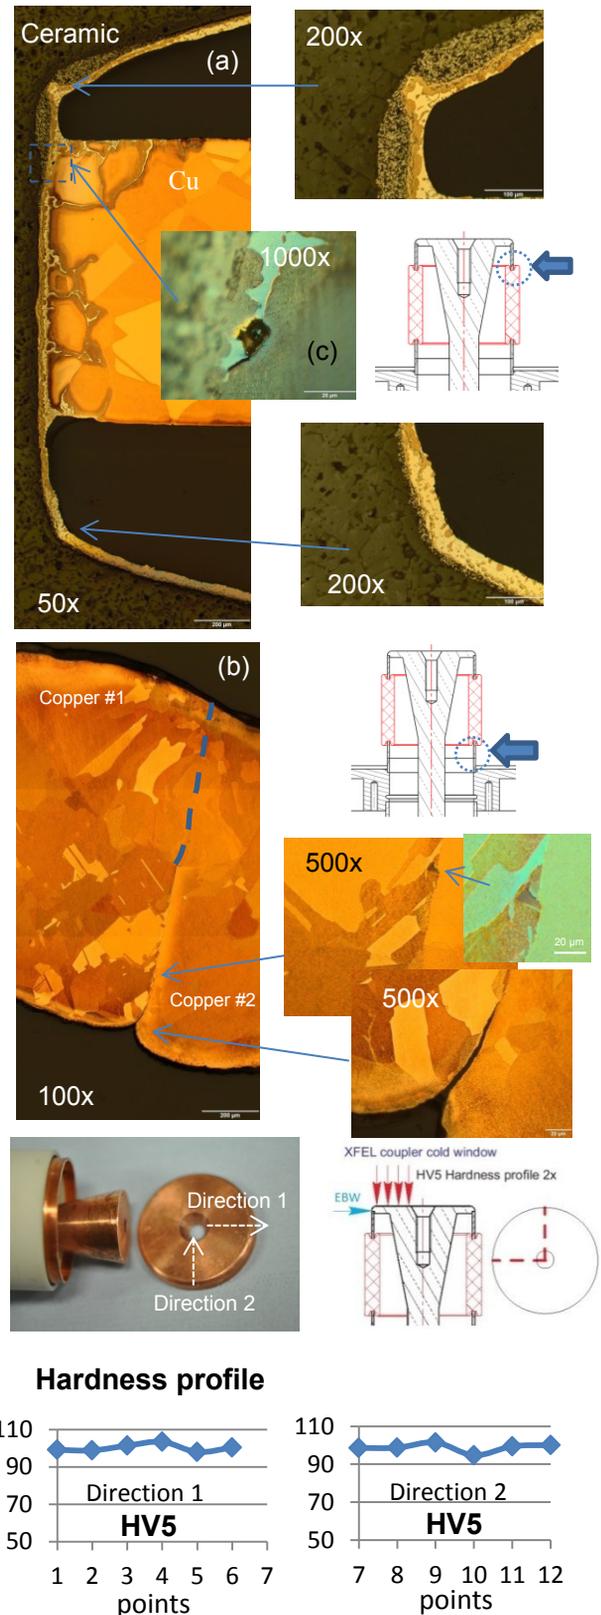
Cold window part. Ceramic-Cu brazing joint (a). Cu-Cu welding joint (b). Hardness profile. Fa. CPI.
